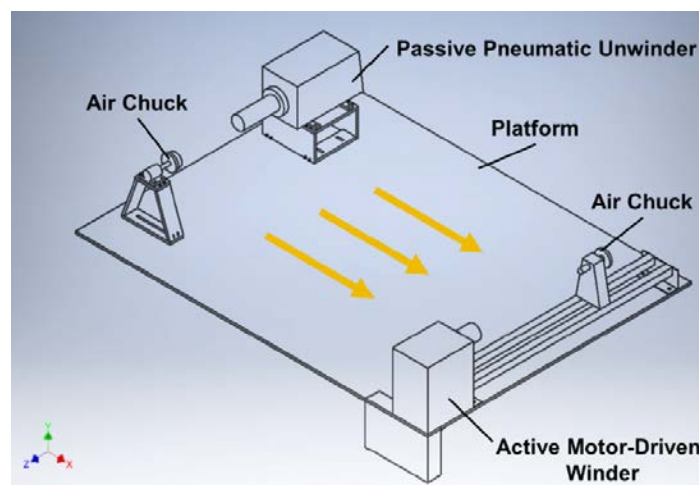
Schematic of spiral-wound membrane element rolling machine with tension control.
